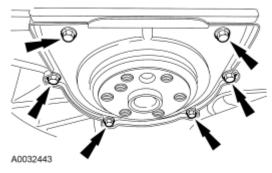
Locating Bolts On Oil Pan Courtesy of FORD MOTOR CO.
